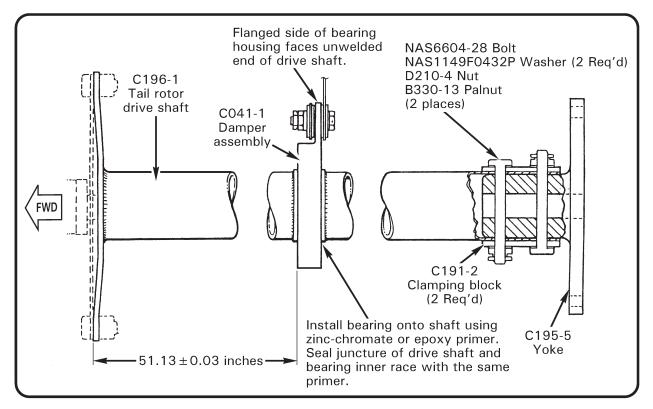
B C196-1 TAIL ROTOR DRIVE SHAFT
